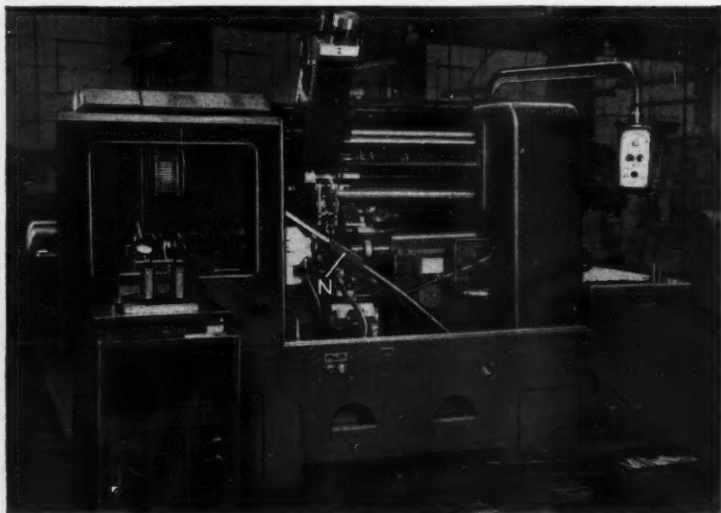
This Maxipilot automatic profiling lathe (Drummond-Asquith, Ltd.) equipped for automatic bar feed, is employed for machining blanks for electric motor shafts
